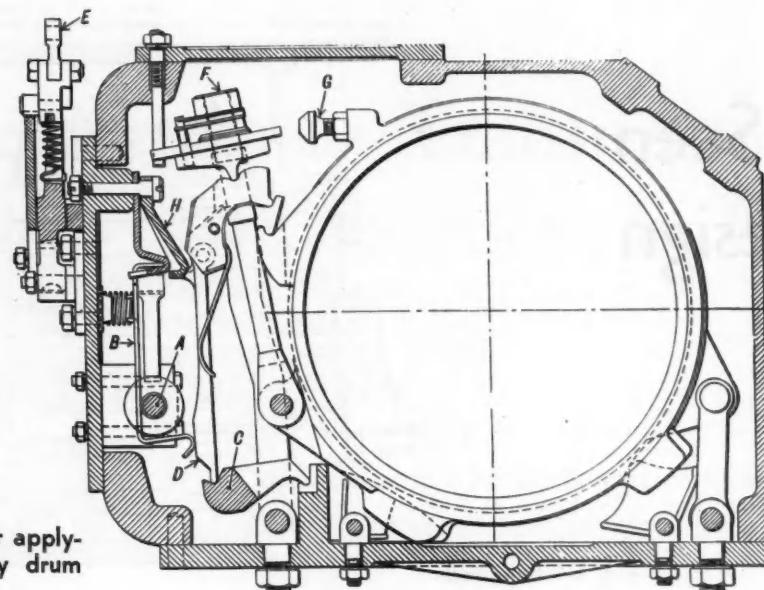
Details of mechanism for applying the brake to the planetary drum
